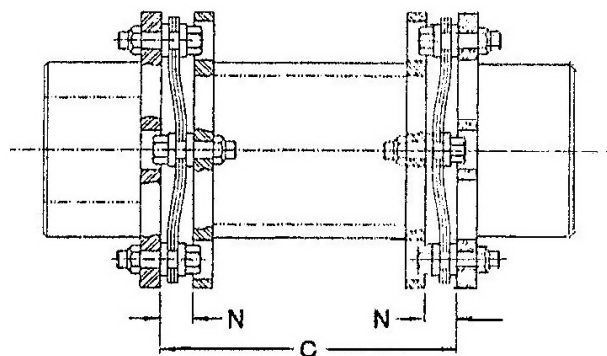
The disk pack is wavy and the dimension "N" between flange faces is larger than indicated on the installation instructions or applicable assembly drawing.
